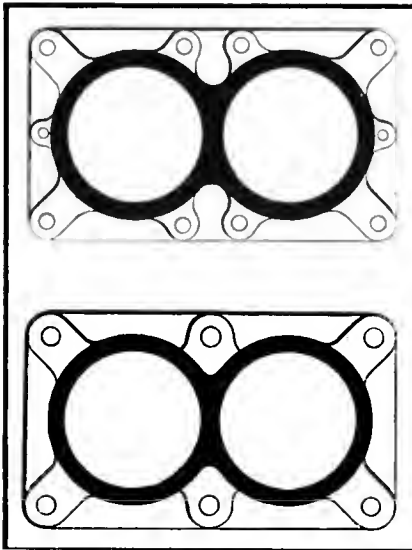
Sections, showing bolting plans twin-cylinder construction
